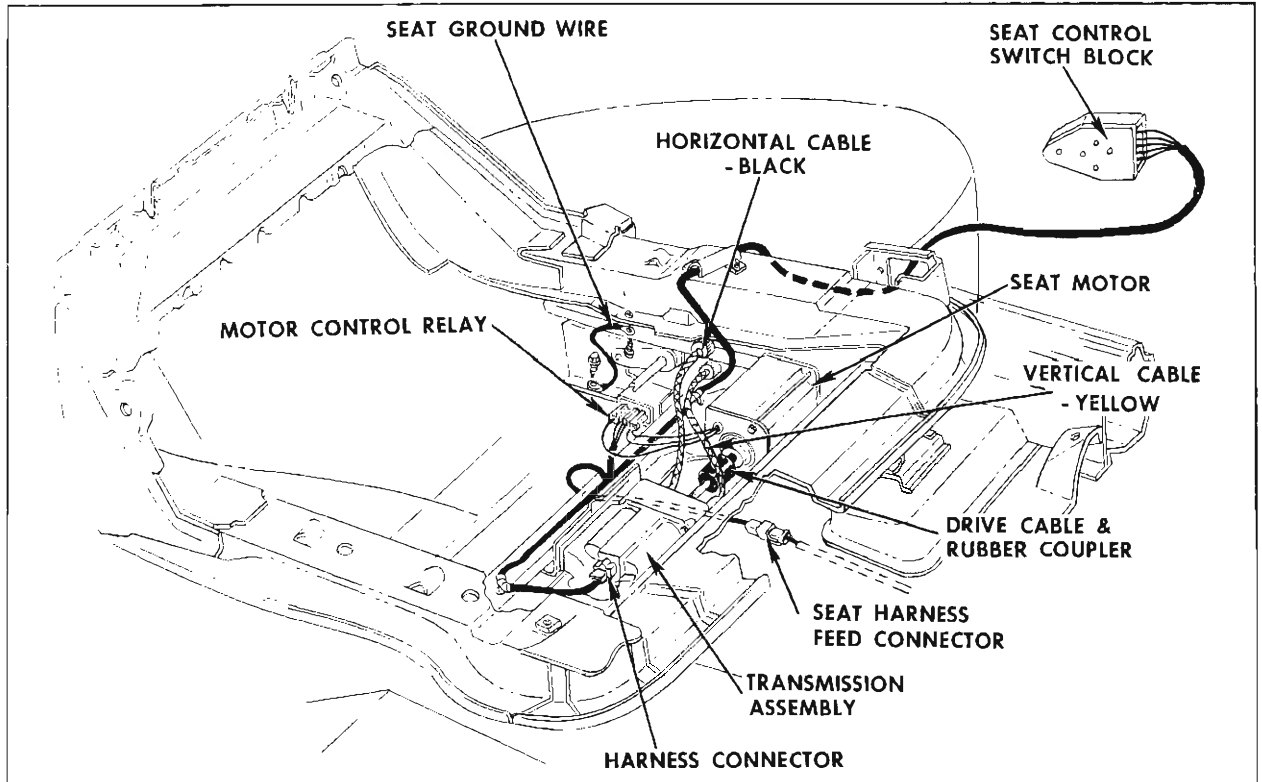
4 Way Seat Installation (Bucket Type)
